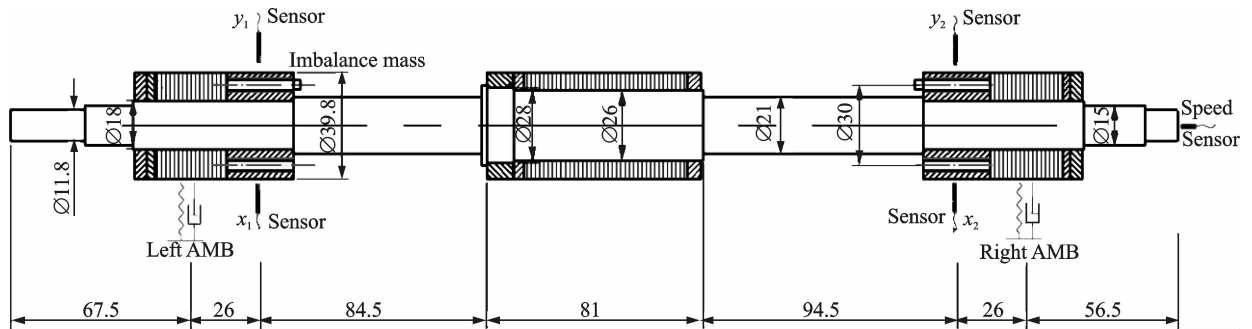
Locations of displacement sensors, magnetic bearings and imbalance planes, and test rotor geometry
